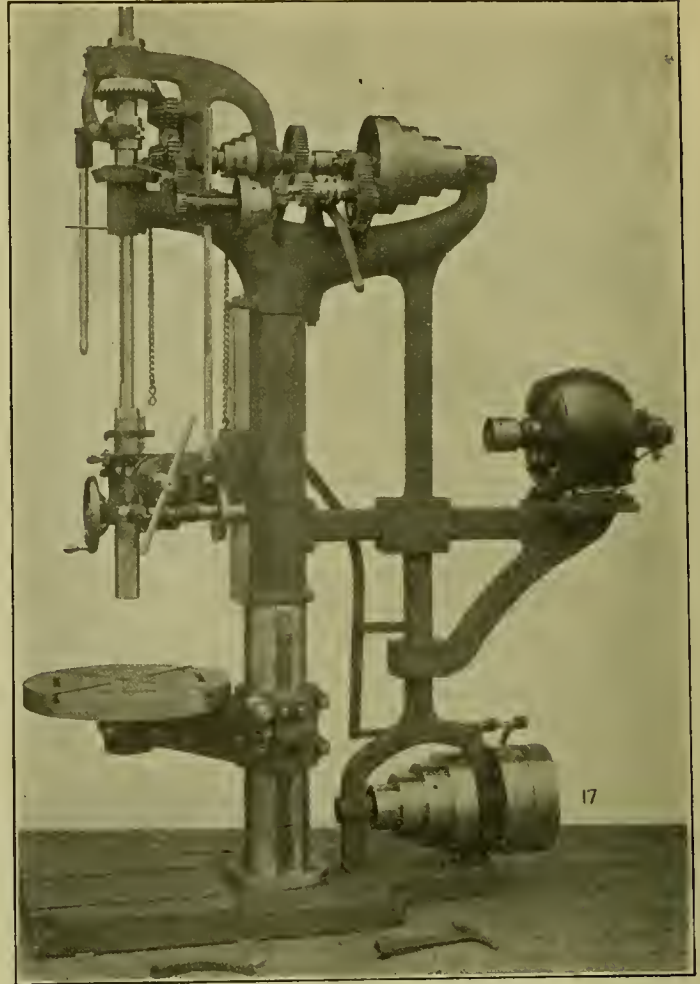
STANDARD DRILL PRESS ARRANGED FOR MOTOR DRIVE. CINCINNATI MACHINE TOOL CO.
